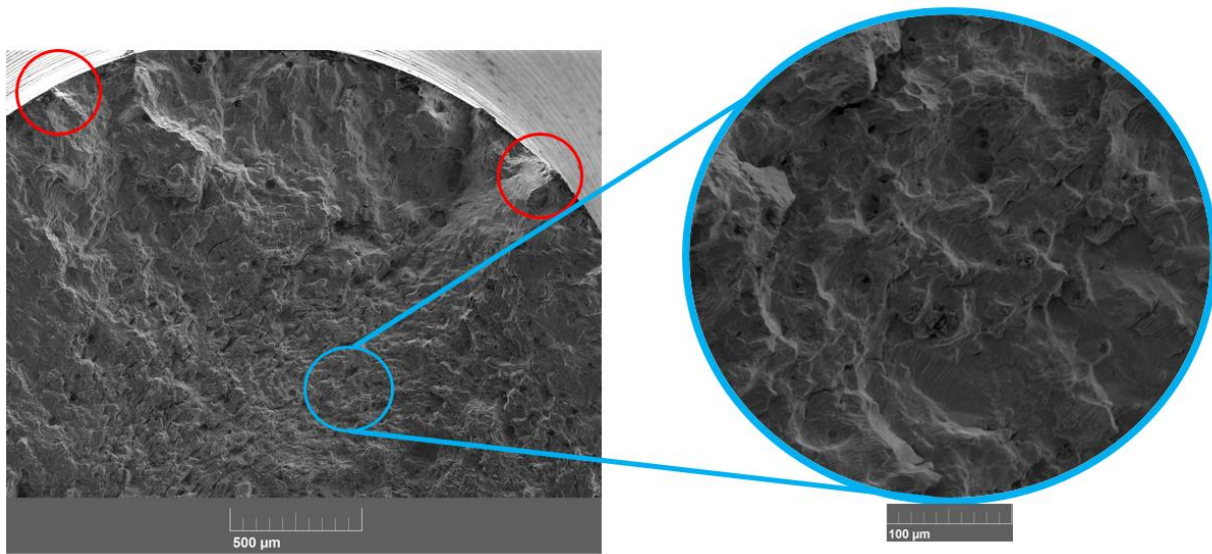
Fracture surfaces of select high cycle fatigue specimens.
